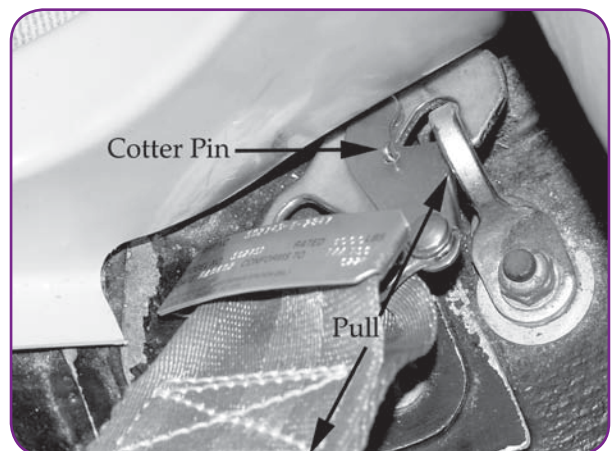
Hook flipped under trim molding—pull is on spring keeper
